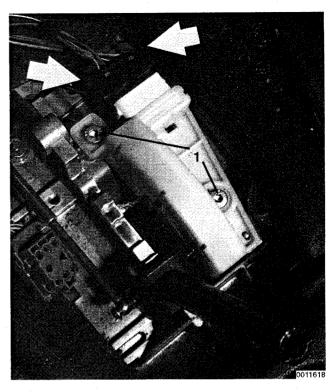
Disconnect harness connector to gear position/neutral safety switch by pressing connector retaining clips together (arrows). Switch mounting screws shown at 1.
